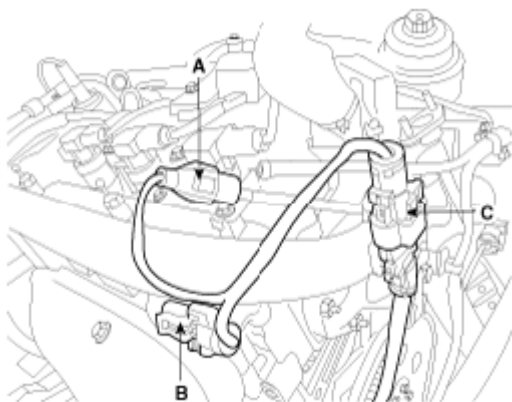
Identifying Connectors For Oil Pressure Switch, LH Exhaust Camshaft CMP Sensor, & LH Oxygen Sensor
